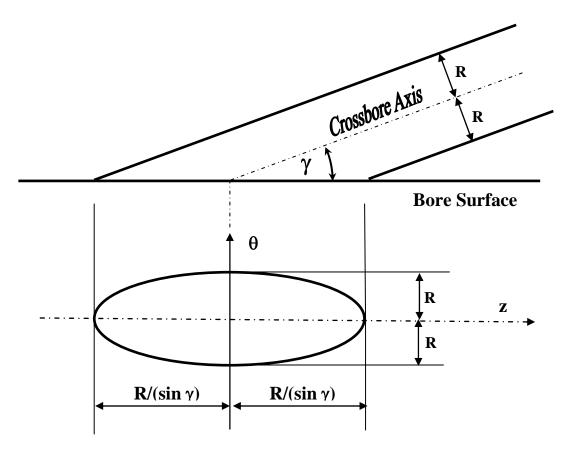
Elliptical Hole Created at Intersection of Inclined Circular Crossbore Hole and Bore of Tube. Hole Radius, R, Angle of Inclination of Hole to Tube Axis
